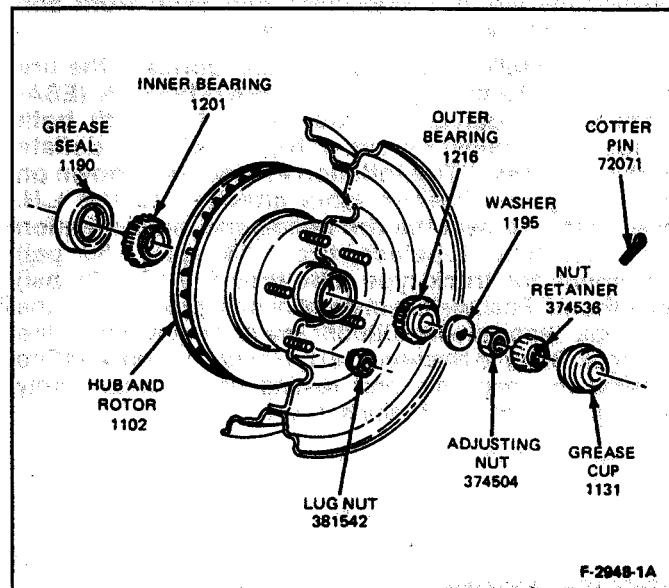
Front Hub and Rotor Assembly Bearings and Grease Seal F-150—F-350 (4x2) and E-150—E-350—Typical
